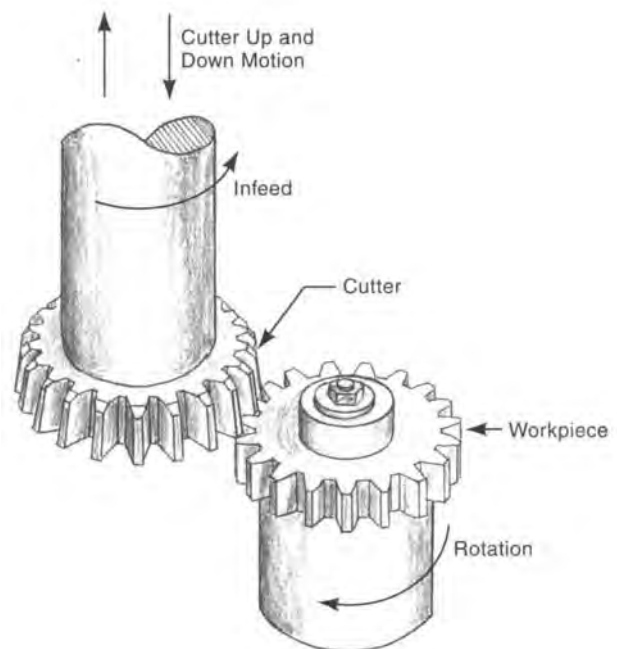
Schematic view of the cutter action in gear shaping. The cutter moves up and down as both the cutter and workpiece rotate, feeding the cutter into the gear blank. The illustration shows a spur gear but the method is applicable for helical gear shaping when the cutter moves at an angle to the axis of the gear.
